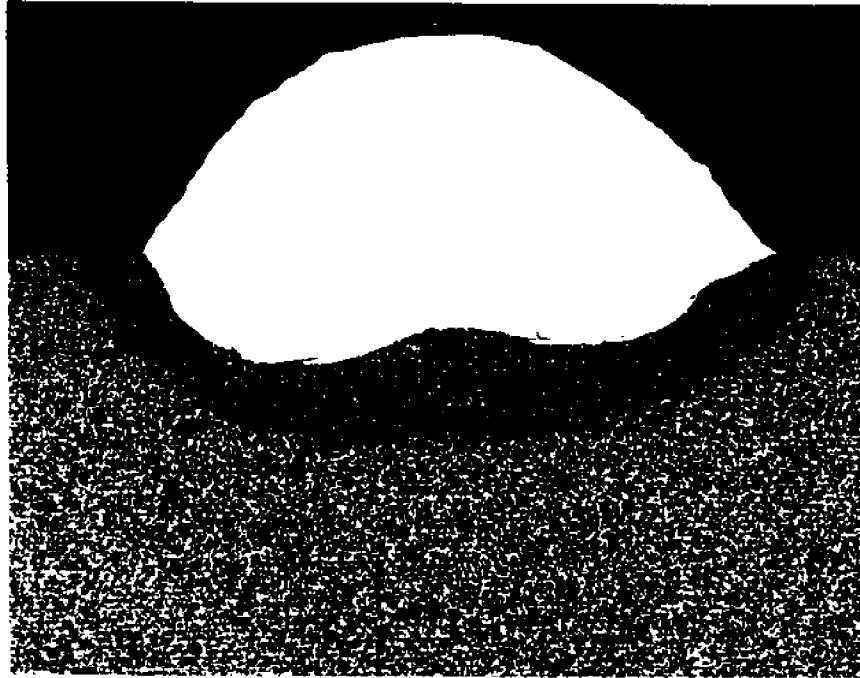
Cross Section of the SOS 308L Weld(air weld) 10X
